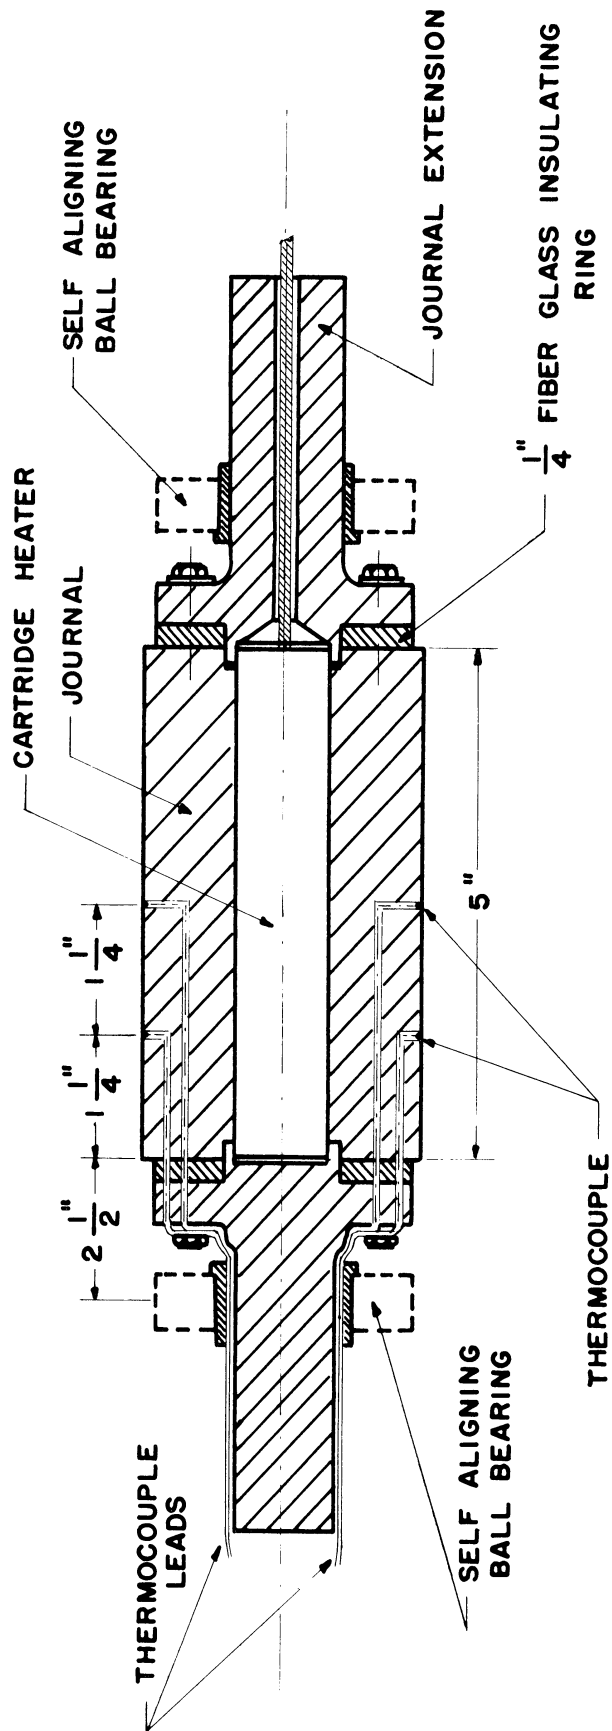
The Test Journal, Showing the Thermocouple Locations, the Heater, and the Self-Aligning Ball Bearings.
